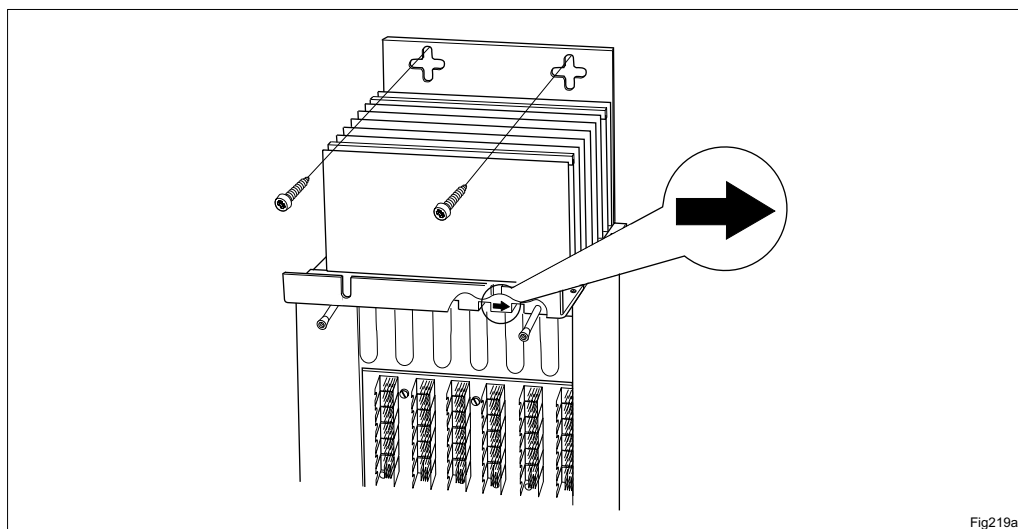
Fitting the cooling flanges to a 4U magazine.
